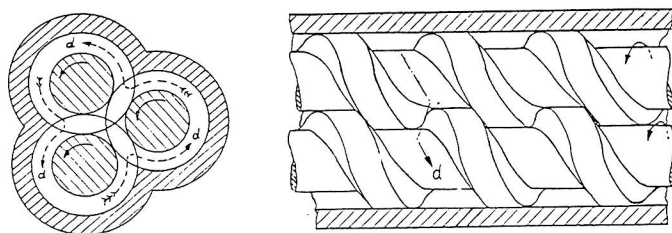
V-shaped 3 co-rotating screw arrangement after Meskat and Erdmenger (5).
